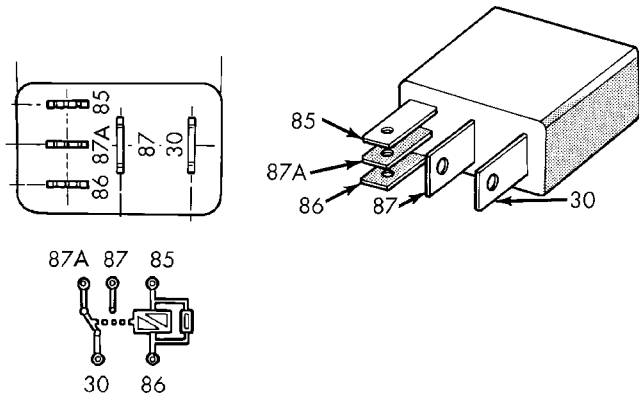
A/C COMPRESSOR CLUTCH RELAY
